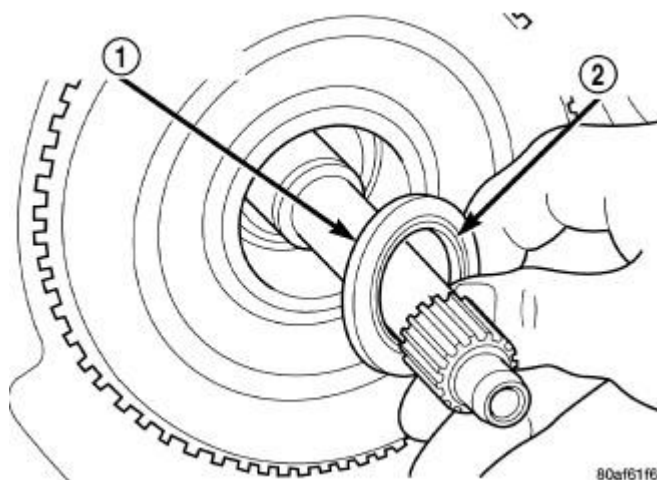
Remove/Install No. 1 Caged Needle Bearing
